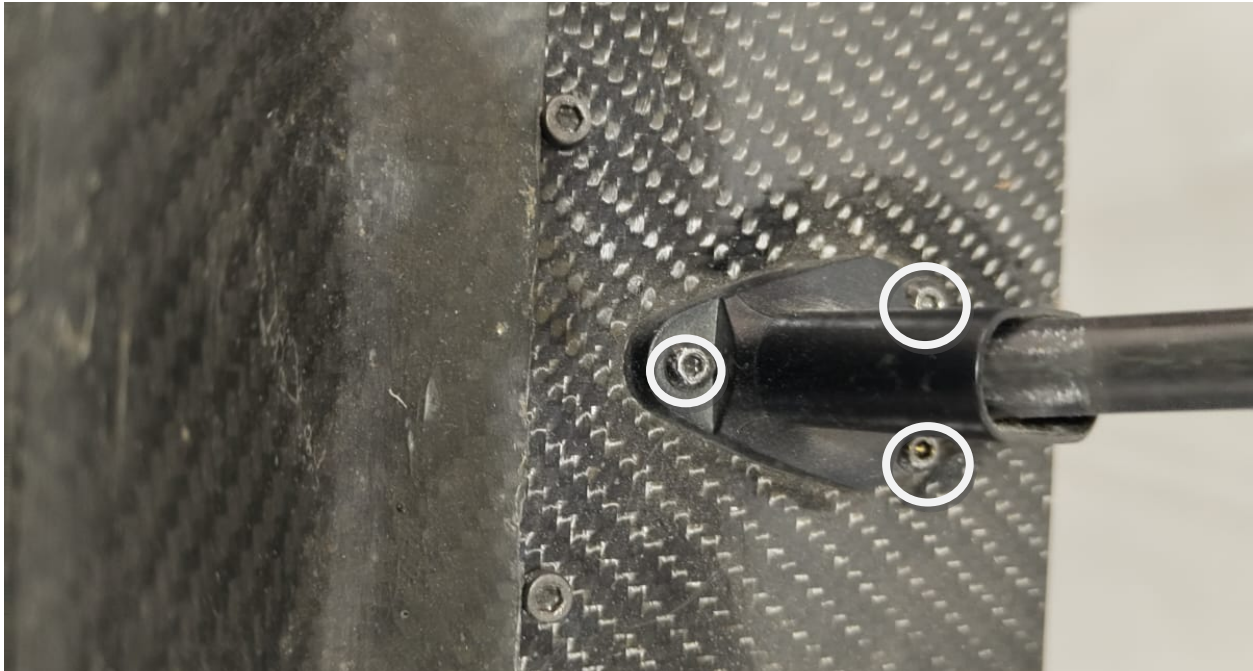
M3 Bolts for holding GPS mount , ensure tightness after 100 flights
